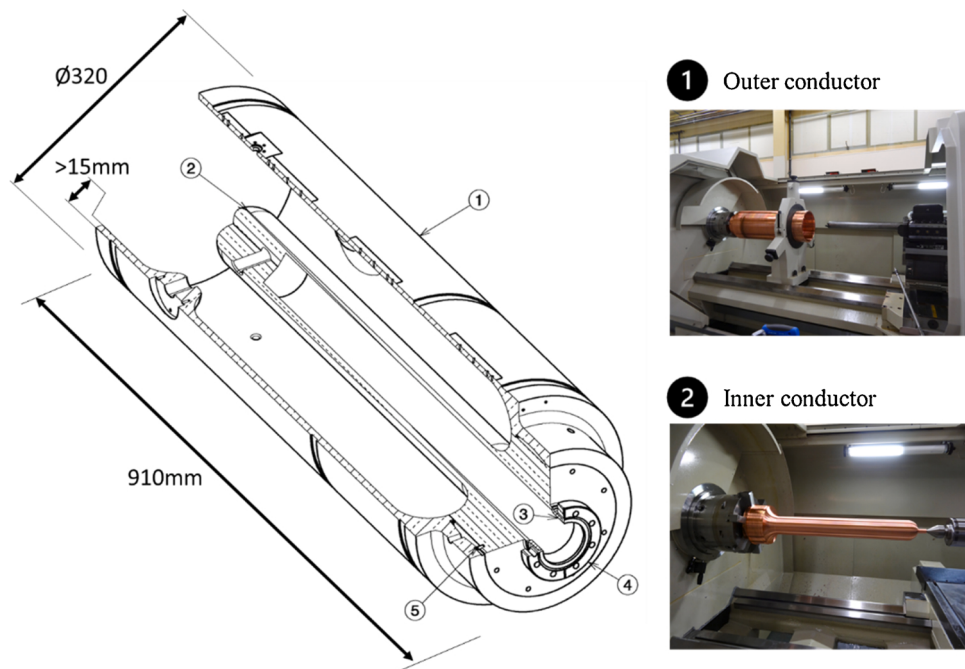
ISOLDE 1/4 view cross-section, outer and inner conductor. The two part are then assembled through shrink fit and electron beam welding for structural and electrical integrity (Sublet et al., 2014).
